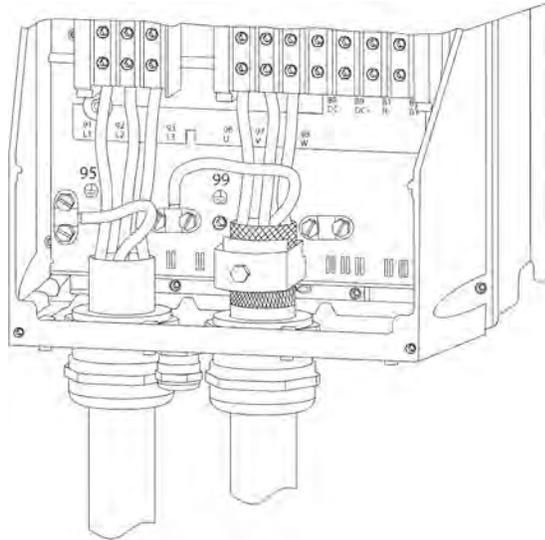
Motor, mains and earth wiring for frame sizes B, C, and D using shielded cable
